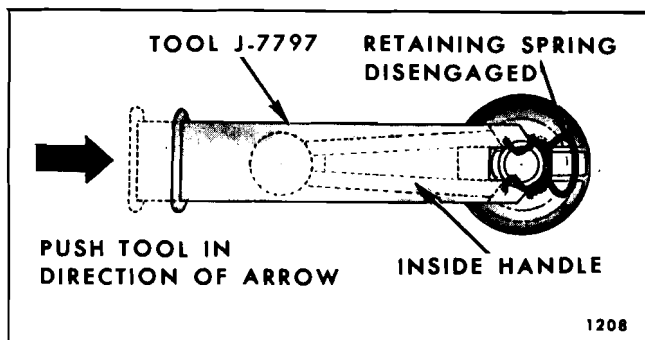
Rear Quarter Window Regulator Handle Removal
